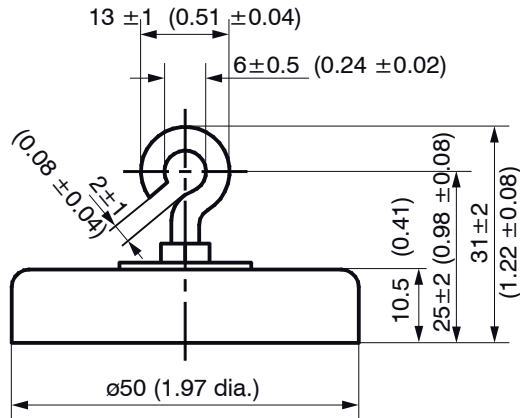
Magnetic holder MH1 - WDS, dimensions in mm (inches), not to scale
